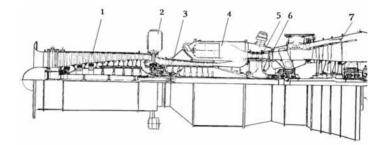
Longitudinal section of rotor system gas turbine engine DR76 type, where: 1 – low pressure compressor (LPC), 2 – auxiliary drives, 3 – high pressure compressor (HPC), 4 – burning chambers, 5 – high pressure turbine (HPT), 6 – low pressure turbine (LPT), 7 – power turbine (PT)
